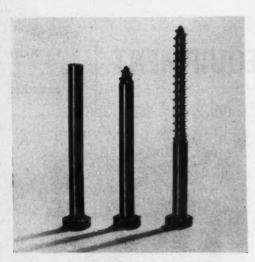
In this illustration are shown (left) a blank, (centre) a pointed component, and (right) a completed roofing screw on which the remainder of the thread has been cold formed. The extended length is clearly indicated
